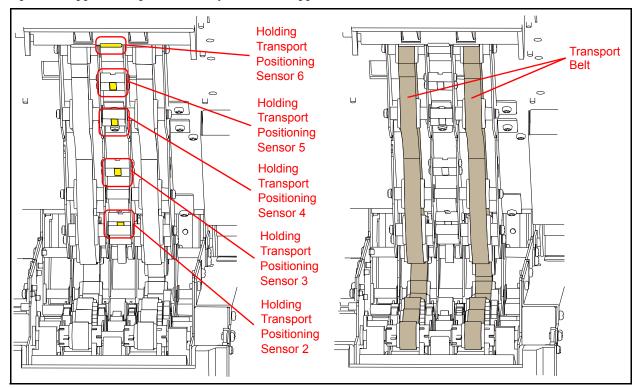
Holding Transport Assembly (Upper) Sensor/Belt Locations
